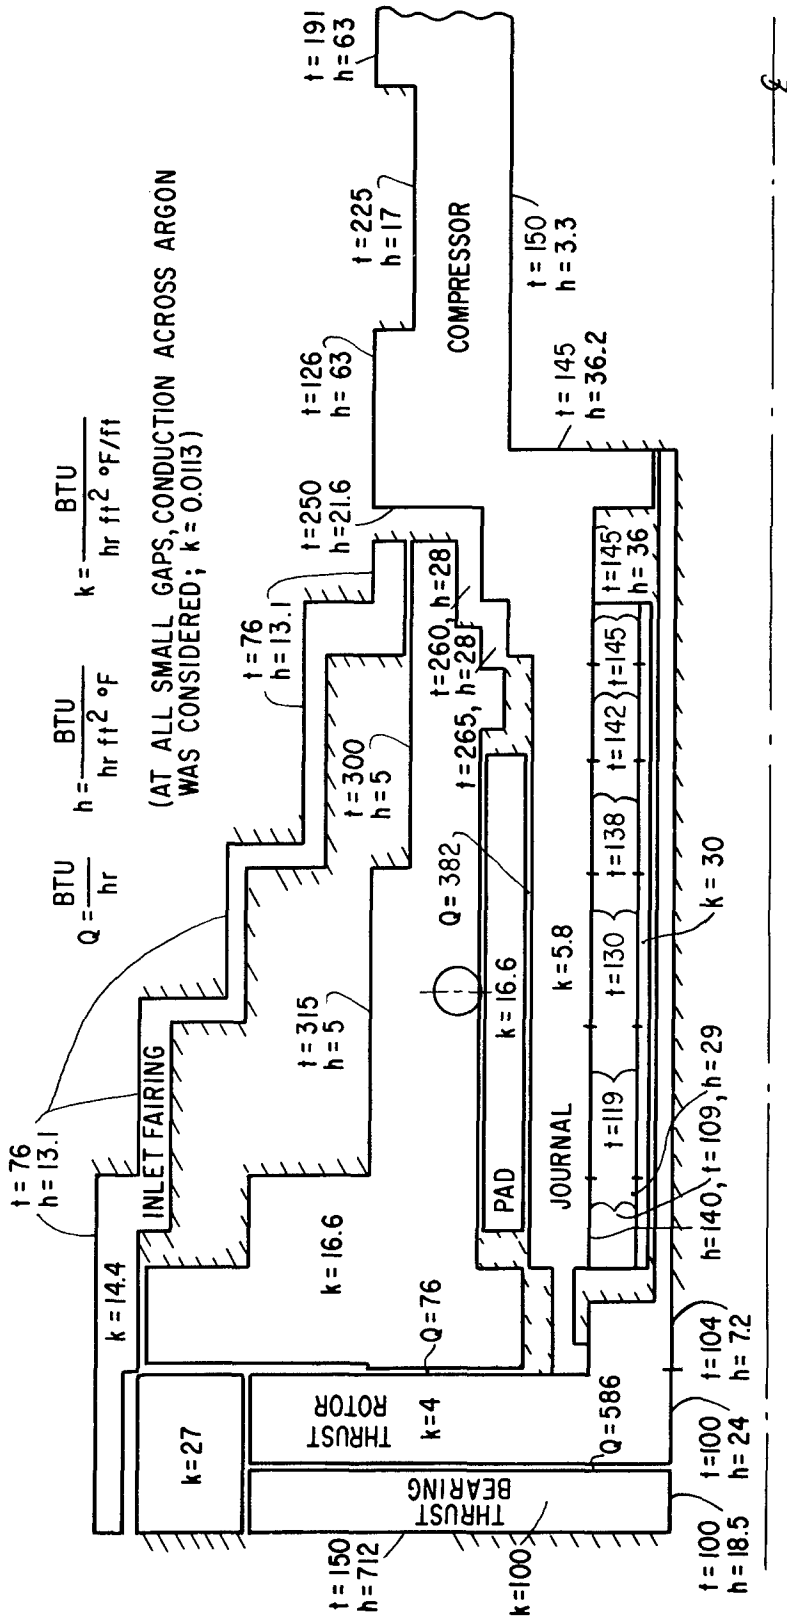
Thermal Boundary Conditions For The Initial Design Of The No. 1 Journal Bearing And Thrust Bearing
